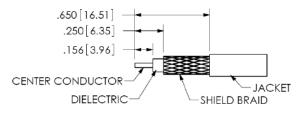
RG-400/RG-142 Coaxial Cable Stripping Dimensions
